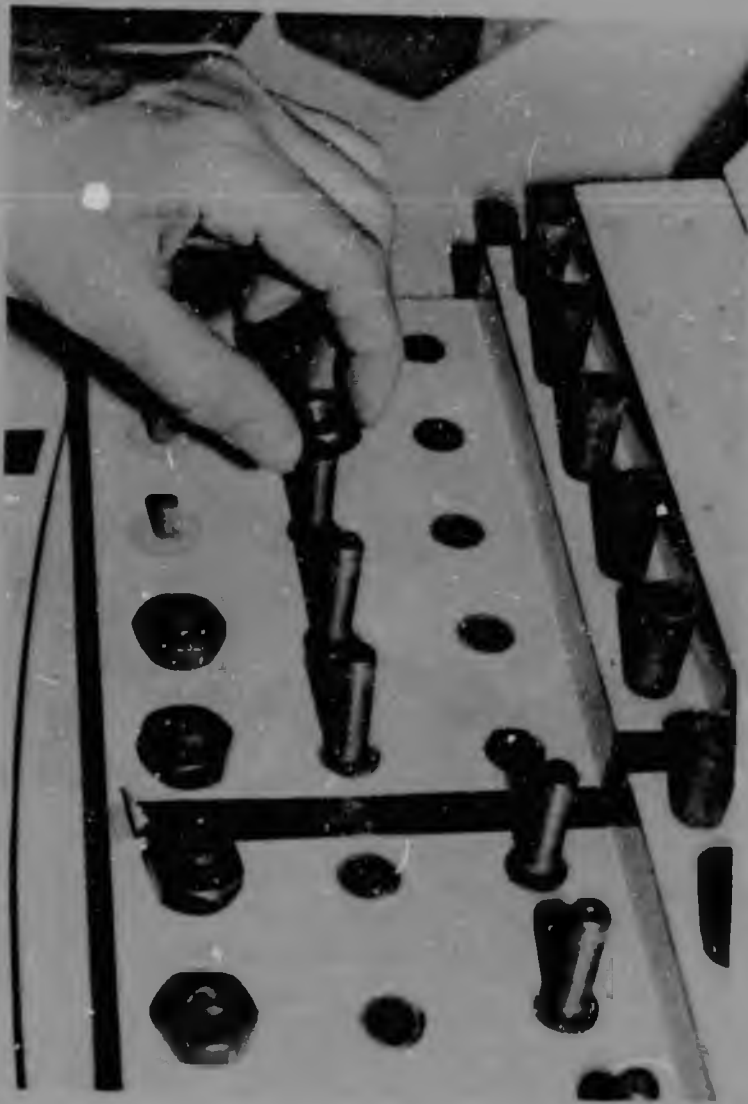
Test 35 showing the left hand positioning the third of five nuts on a bolt held in a jig. Note that the bolts are in the jigs nearest the testee.
